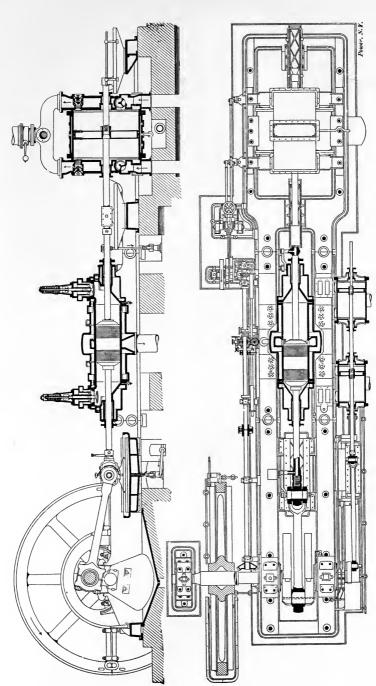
Koerting Two-Cycle Gas Engine, Showing Valve Group.
